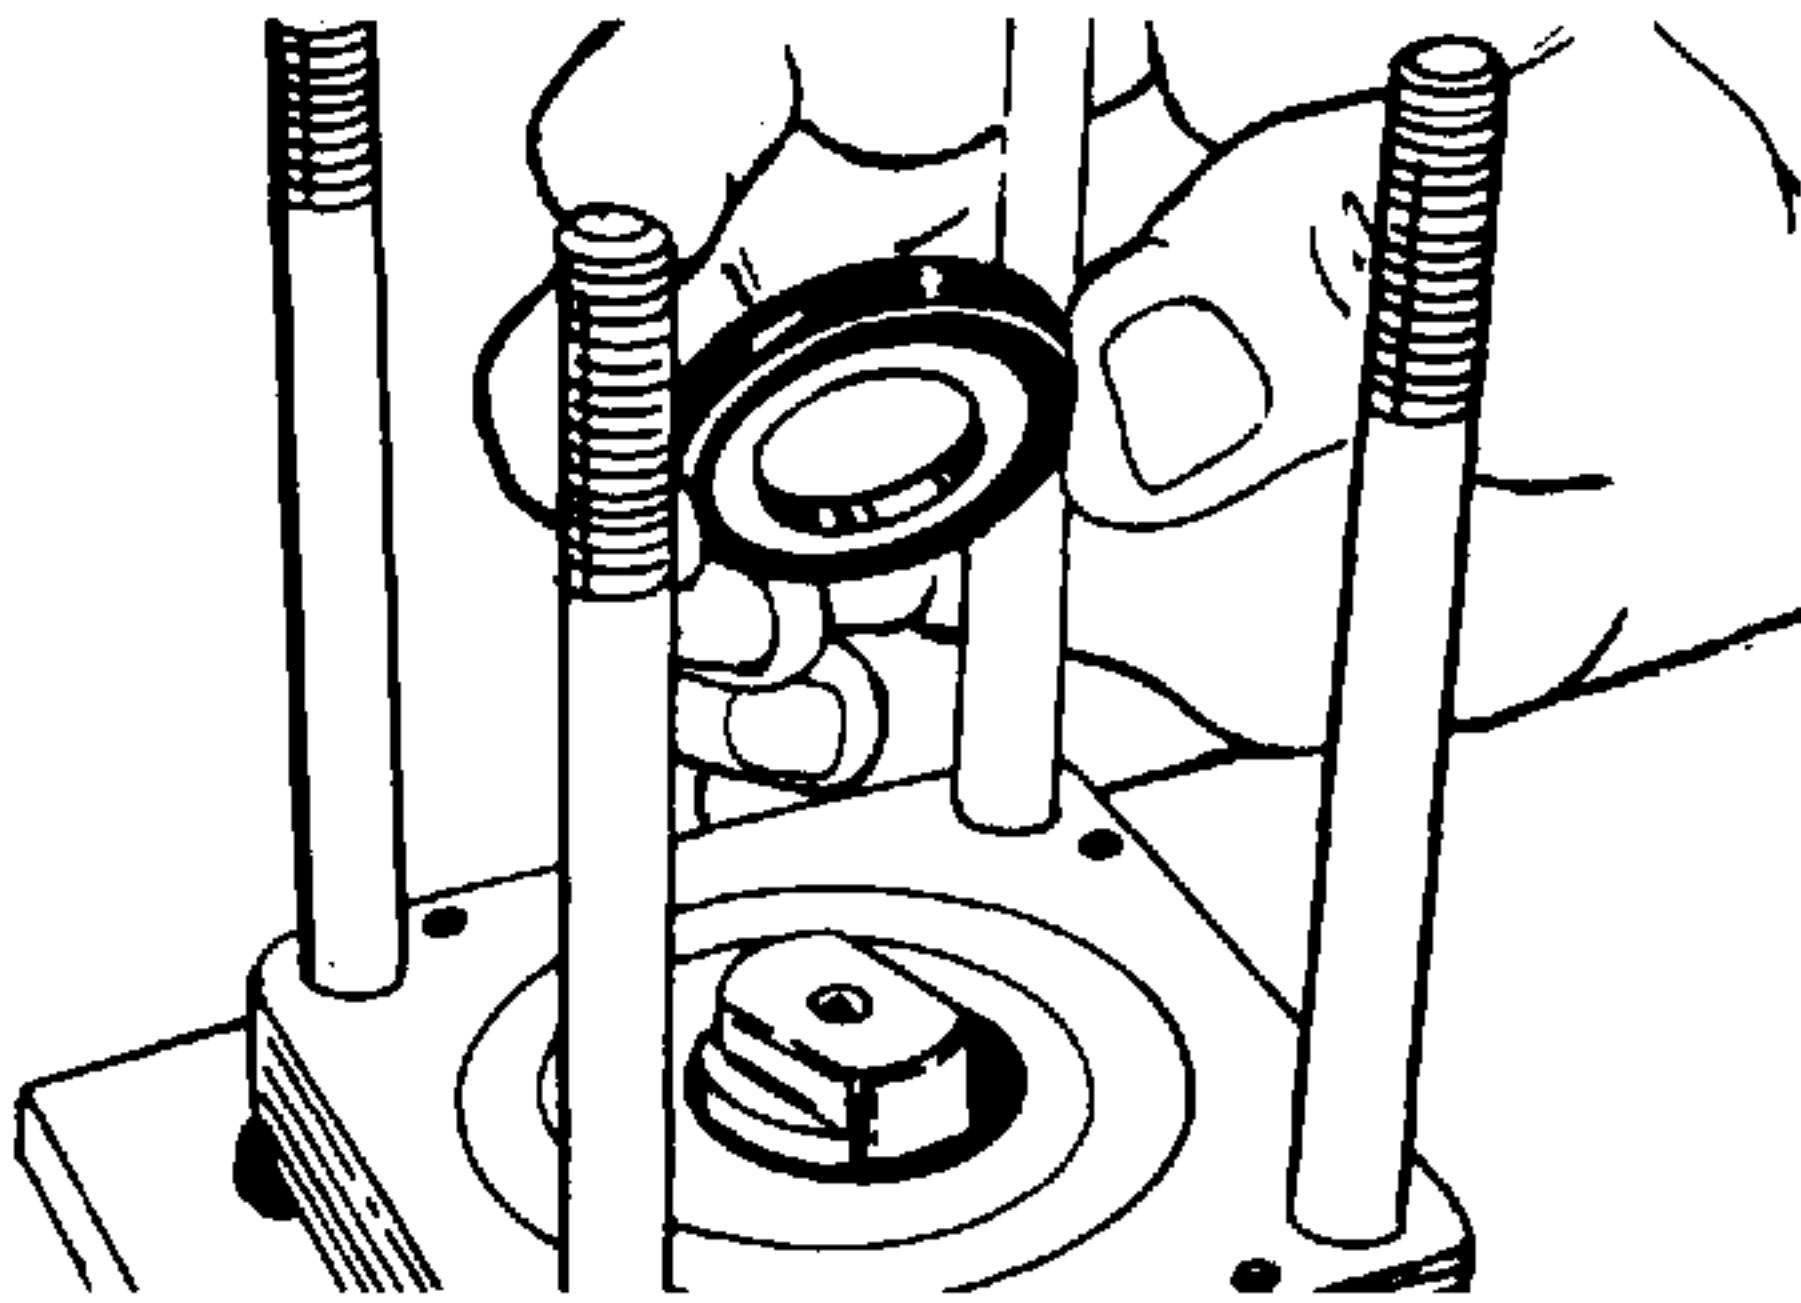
Installing Assembled Face Seal, Back-Up Ring and Spacer.
